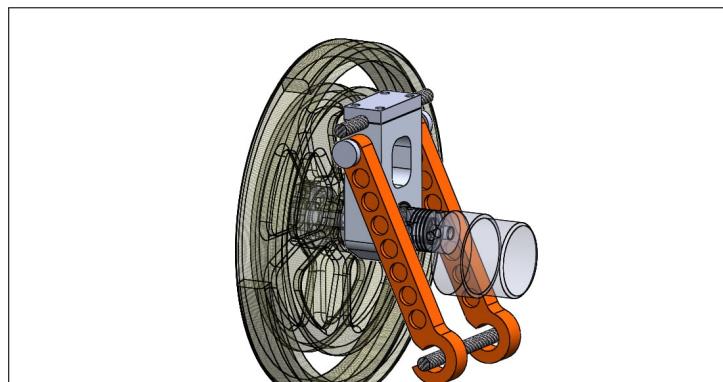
ABS rods connecting the mounting block to the lower truss member.
